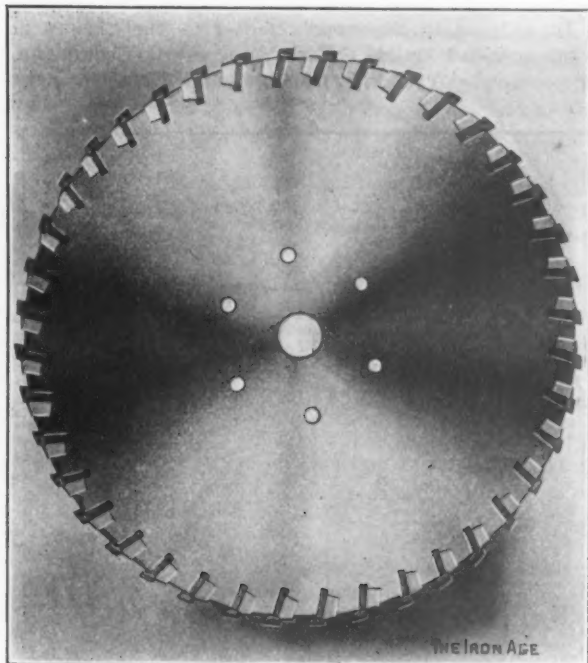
Disston Premier Inserted Tooth Metal Saw.
